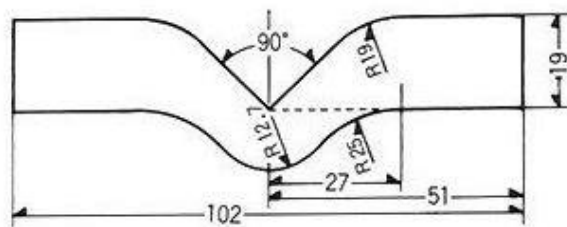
ASTM D624-C tear test specimen dimensions [36]
